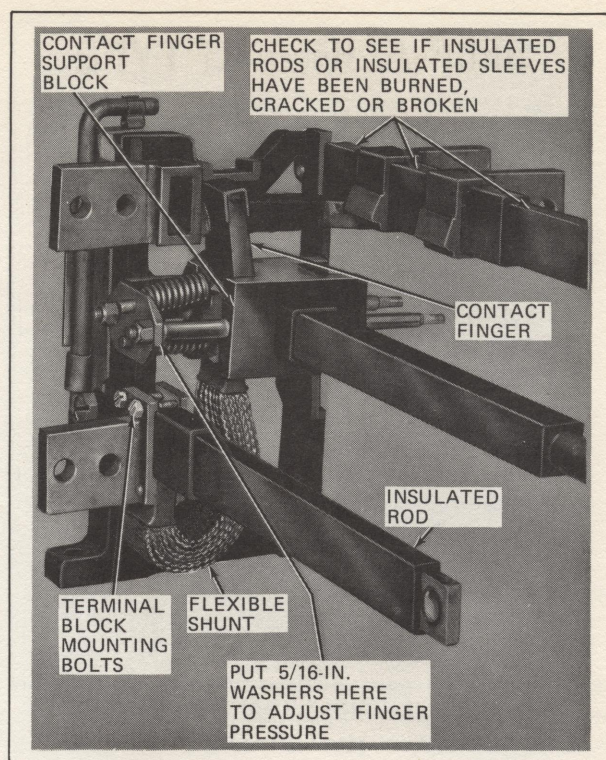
LOWER END FRAME AND PARTIAL ASSEMBLY OF CONTACT AND SUPPORT PARTS.
